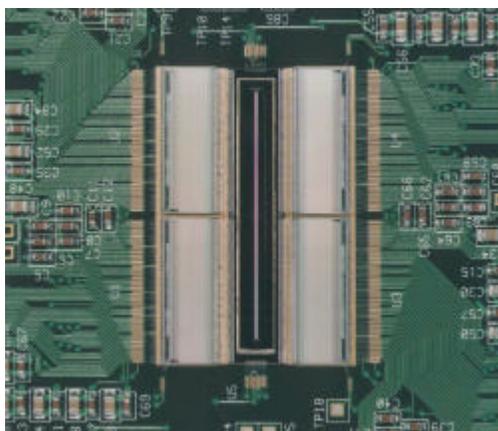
Multi-chip module consisting of four custom driver dies and a 1,080 element linear GLV array.
